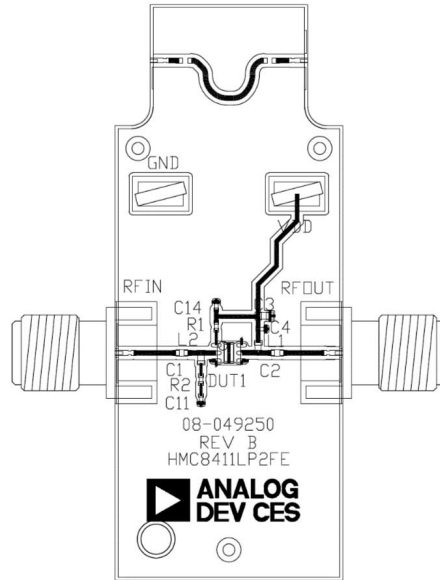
EV1HMC8411LP2F Printed Circuit Board (PCB)
